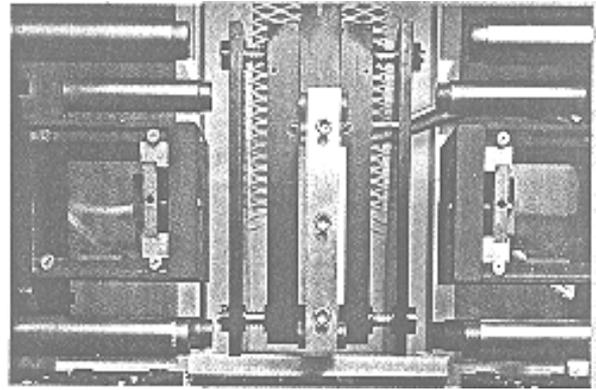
Tooling displacement stops in a hot tool welder, used to control melt and part dimensions.
